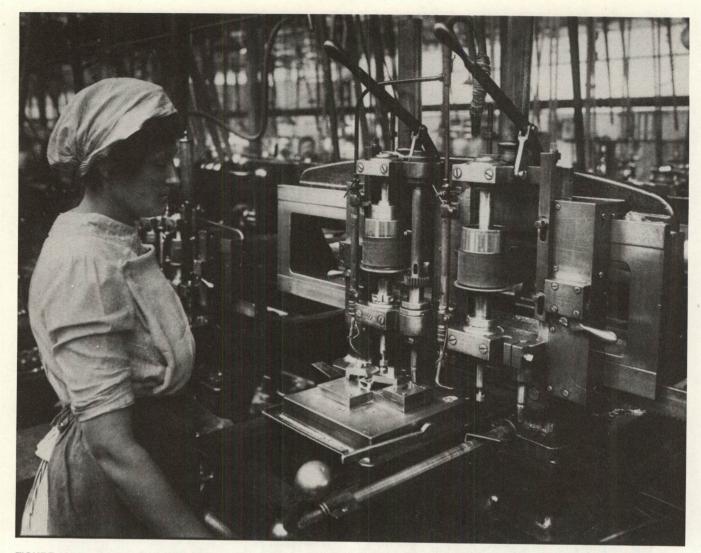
A two-spindle Pratt & Whitney Co. profiling machine being used to mill the exterior surface of the Modèle 1900 frame. This machine was developed for finishing gun parts. A turn-of-the-century Pratt & Whitney catalog stated: "With the two-spindle machine a roughing and a finishing milling cut may be taken at one setting of the piece, finishing it accurately to the desired dimensions and doing away with hand fitting." (Fabrique Nationale)
